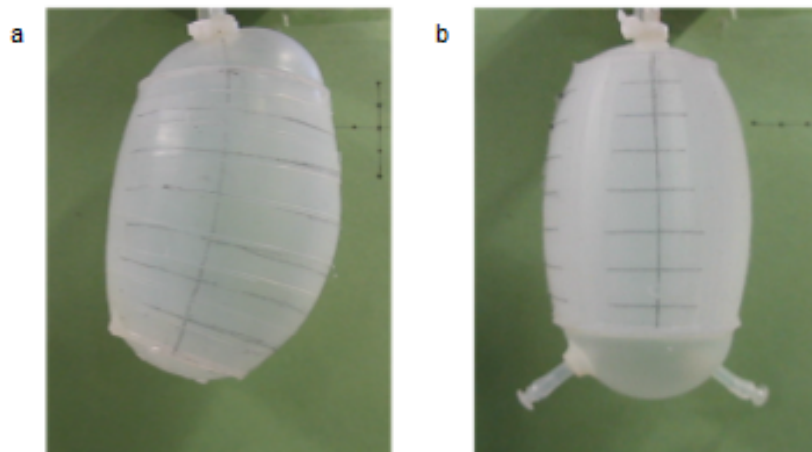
(a) Actuator cast in a stacked acrylic mould. The expansion is not uniform. (b) Actuator cast from a 3D printed mould. It shows a more uniform expansion. Adapted from [160].
